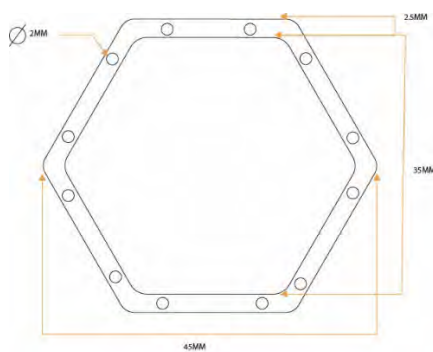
DESIGN FINALIZATION SENSOR DIMENSIONS
